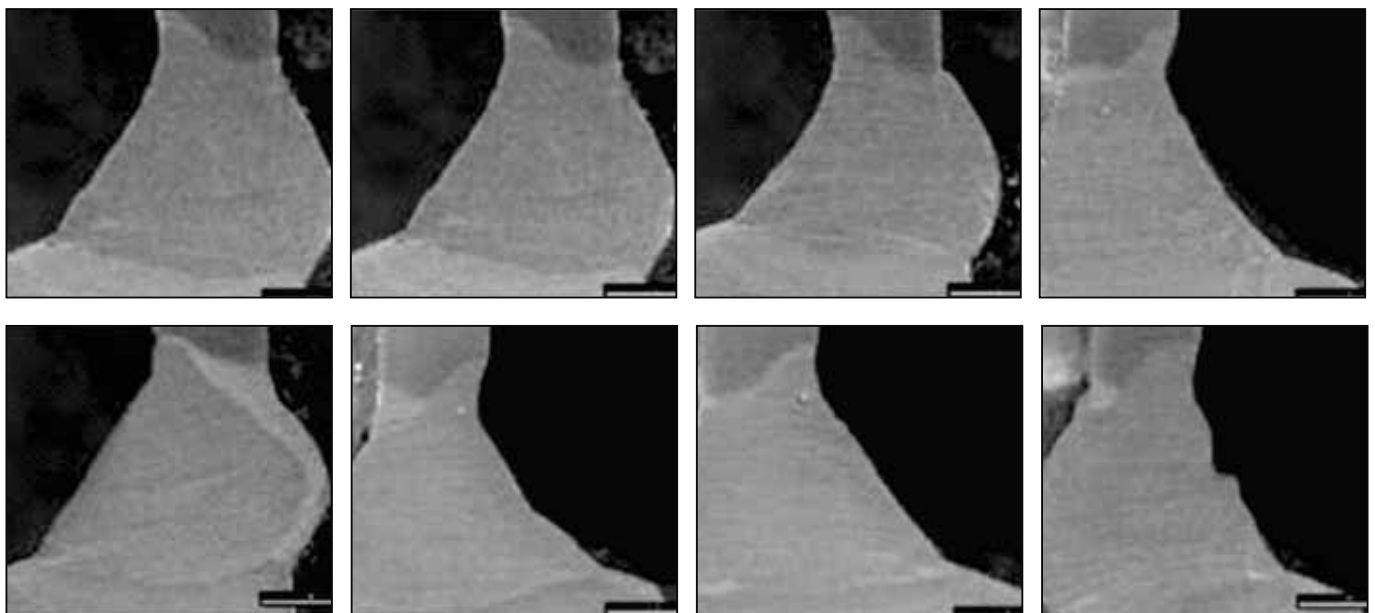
Macro analysis of full penetration header to tube welding
